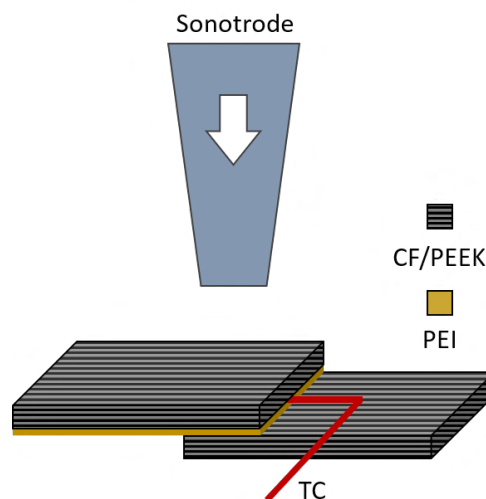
Welding configuration for short impulsion time welding experiments
